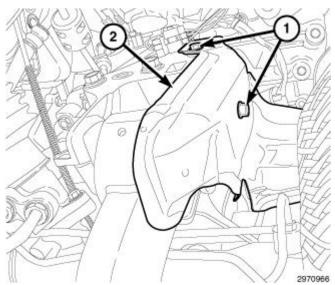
Rear Engine Mount Heat Shield & Bolts Courtesy of CHRYSLER GROUP, LLC
